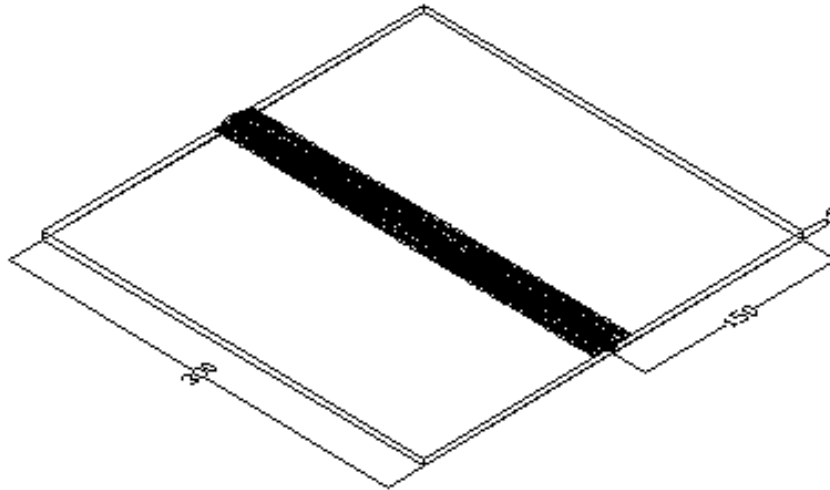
Dimensions of friction stir welded joint in mm
